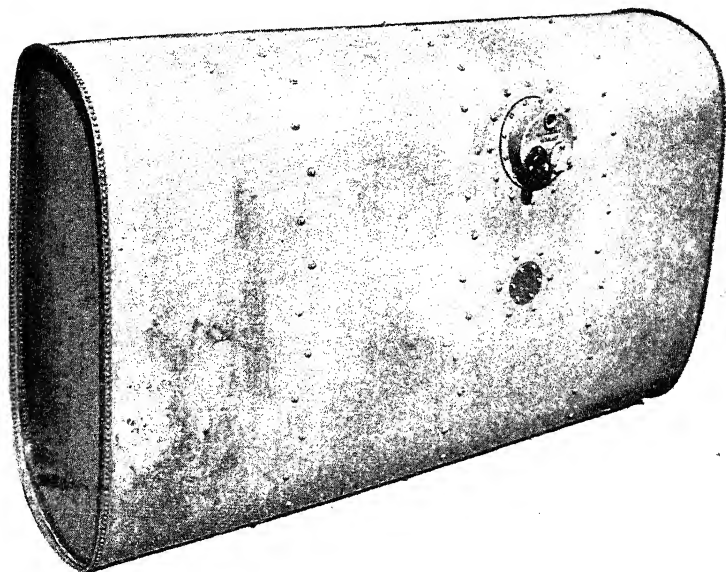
GLENN L. MARTIN—RIVETED DURALUMIN TANK,
